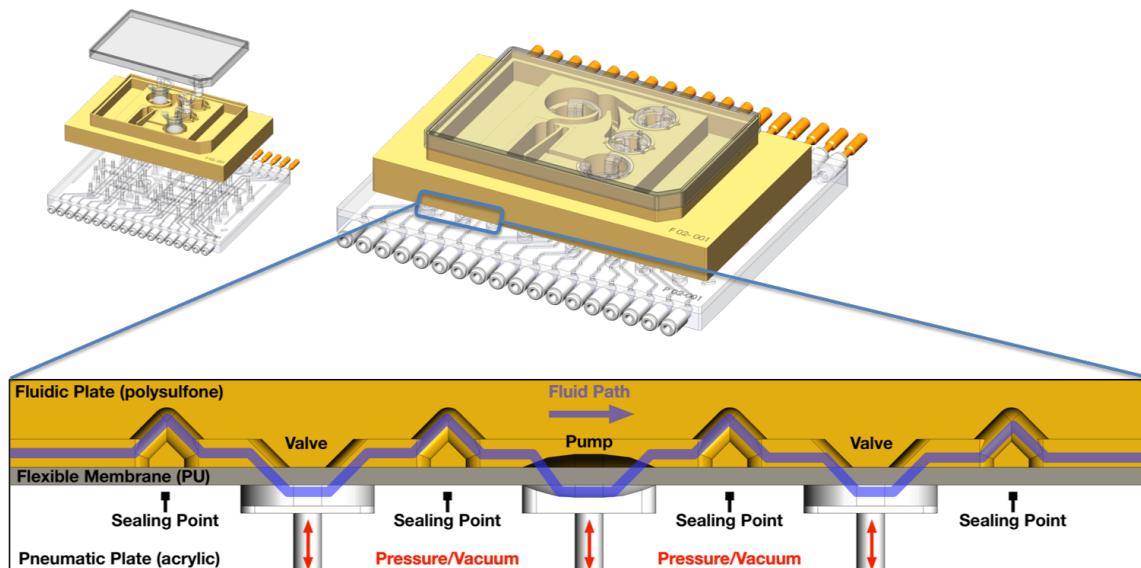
Existing platforms - exploded view and cross-section of pumps. Image courtesy of Collin Edington, a Post-Doc in our lab.
